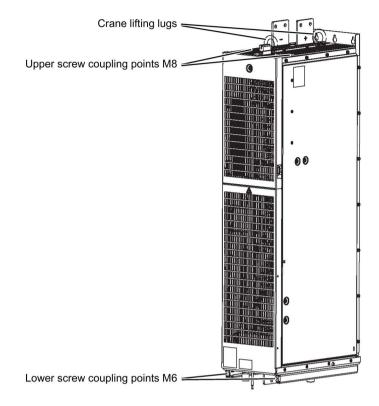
Crane lifting lugs / screw coupling points for mechanical support
